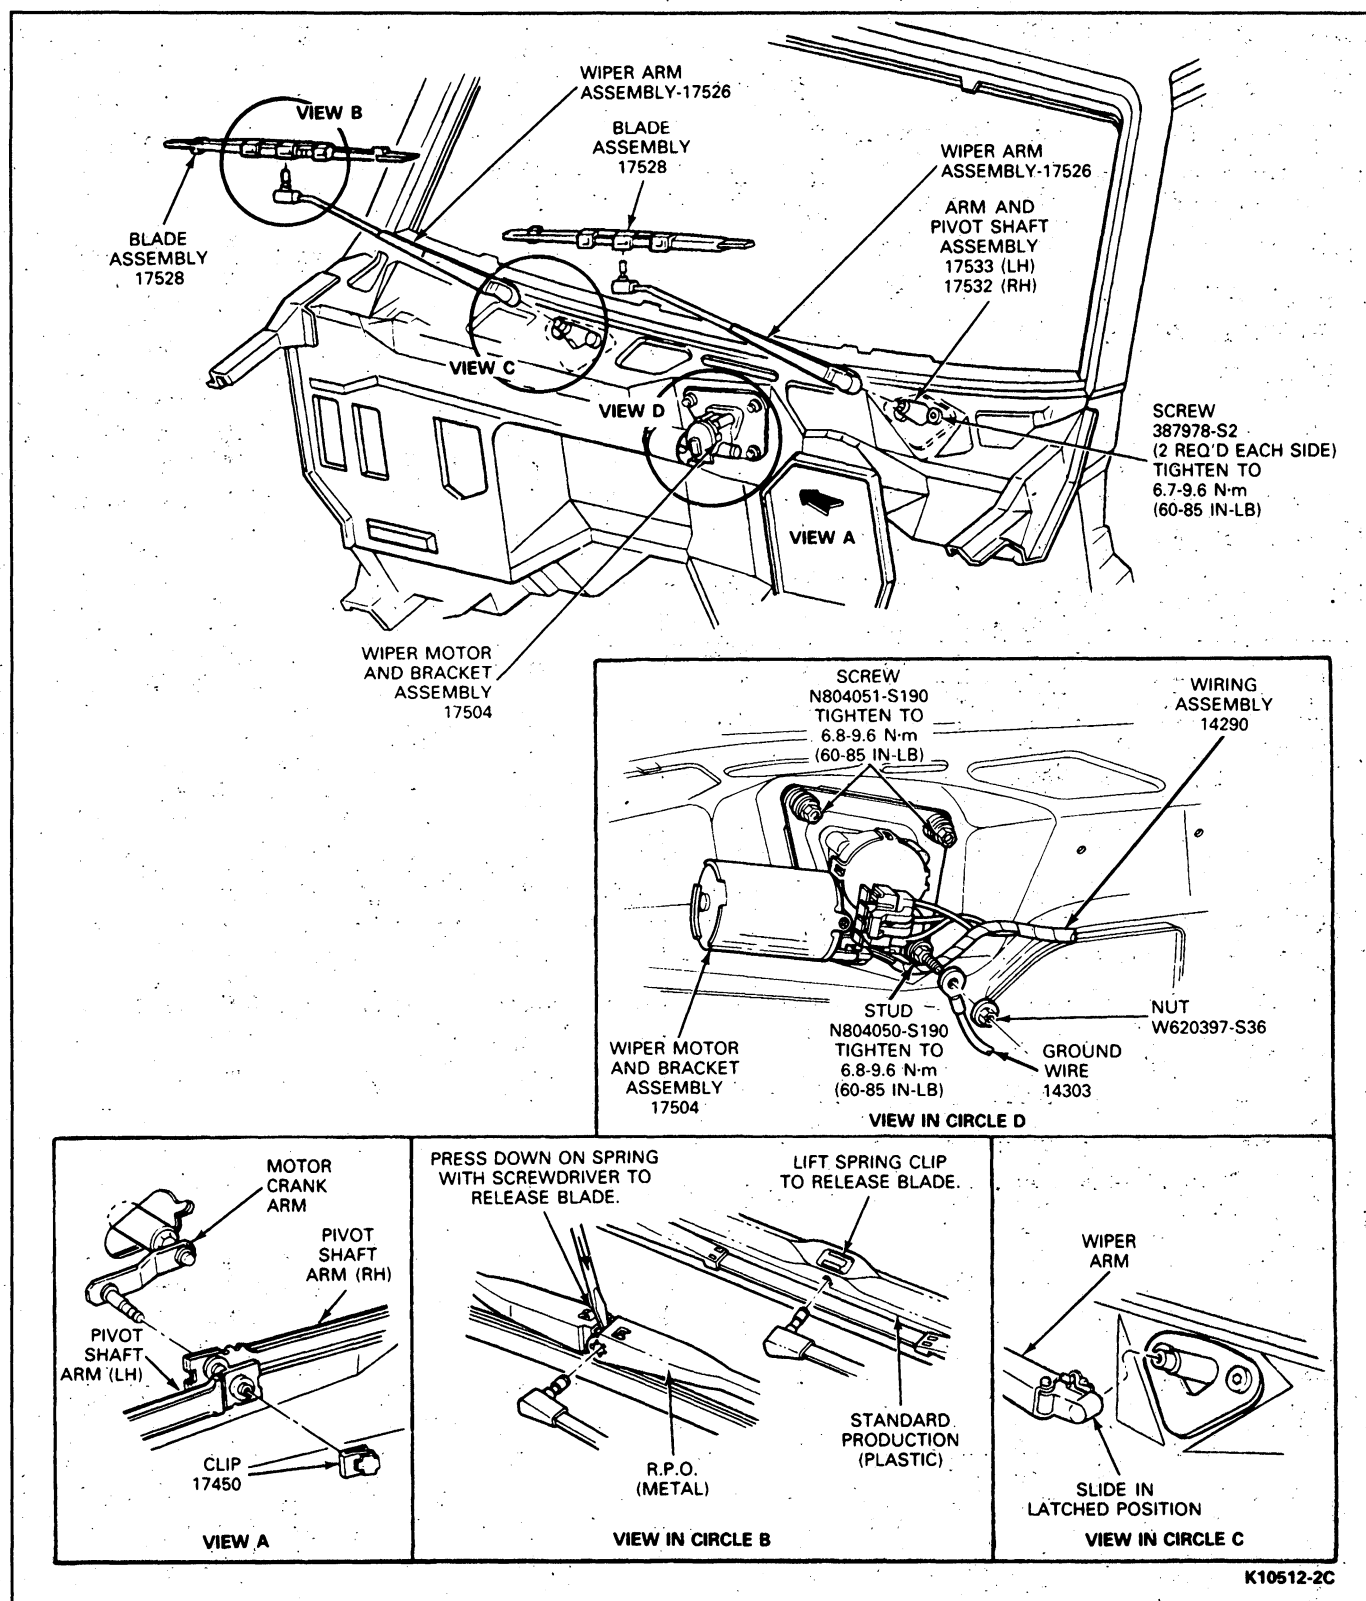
Windshield Wiper Motor Installation—F-150—F-350, F-Super Duty and Bronco
